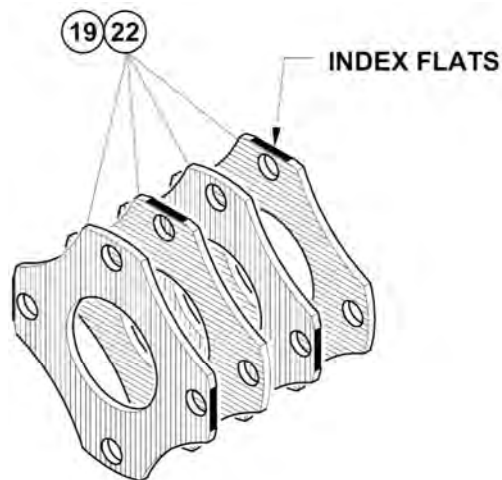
Forward Short Shaft Assembly – Removal/Installation (Sheet 1 of 5)
